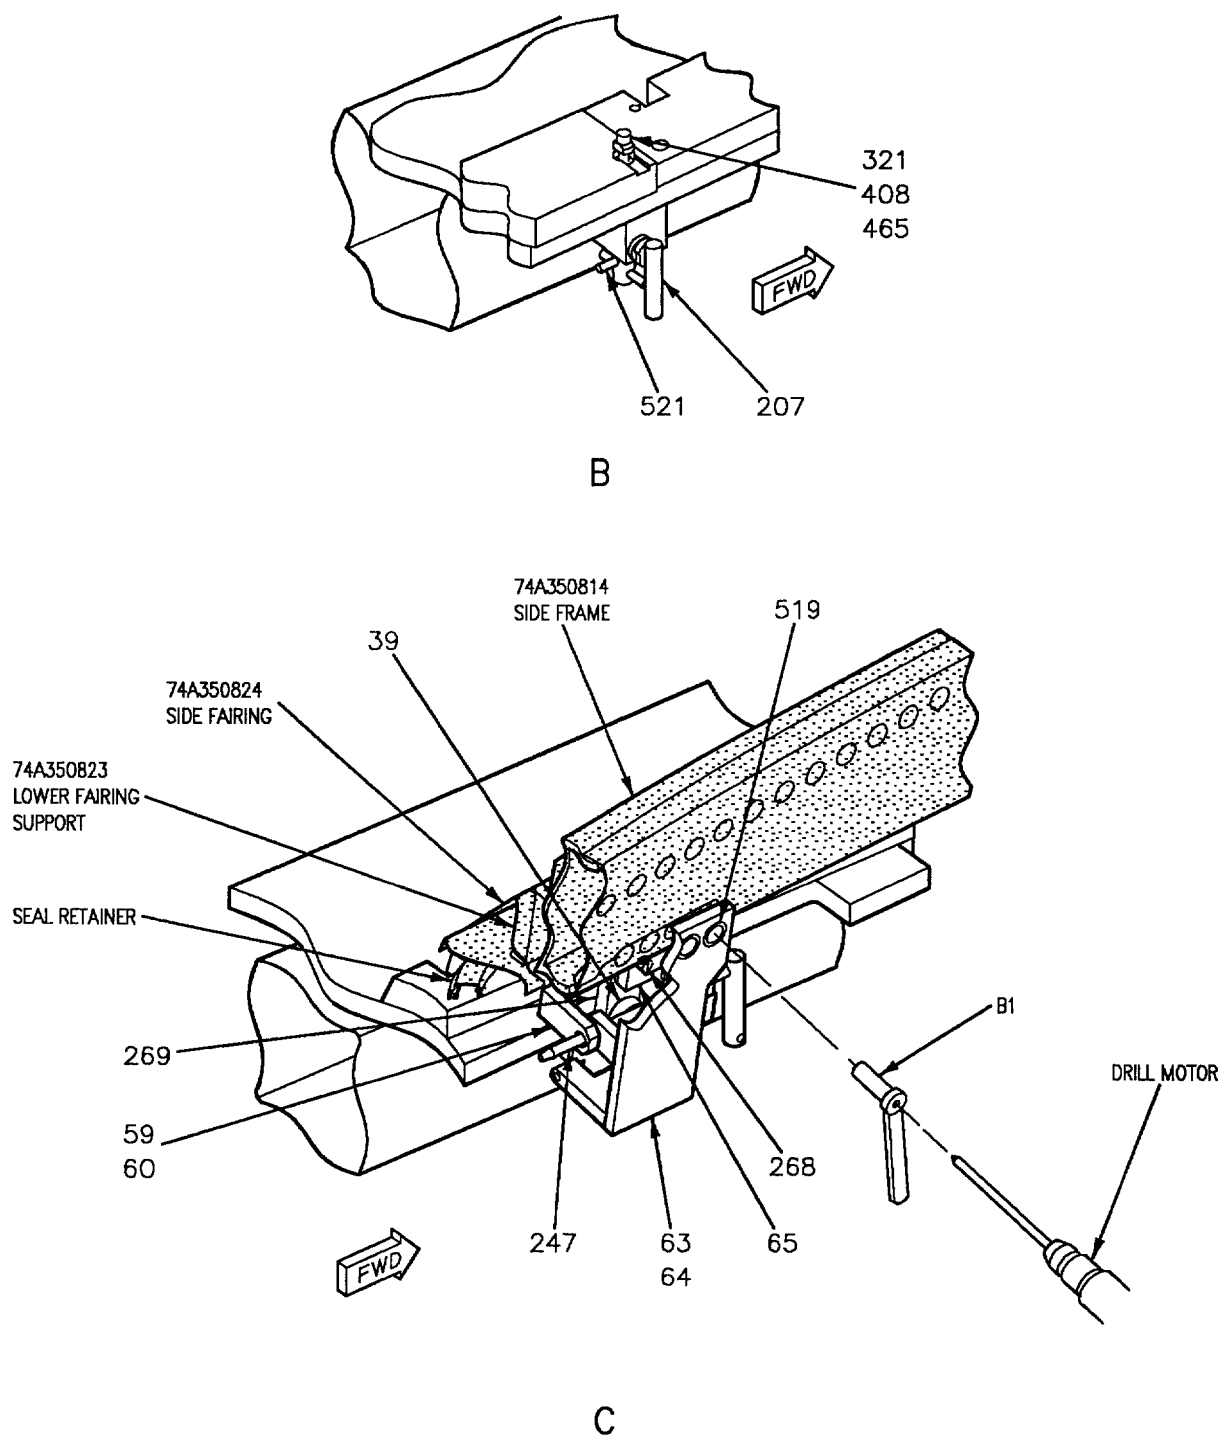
Replacement - Latch No. 6 (Sheet 2)
